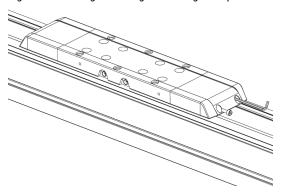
Installing the cover strip in the cover strip clamp for linear modules HM-S
